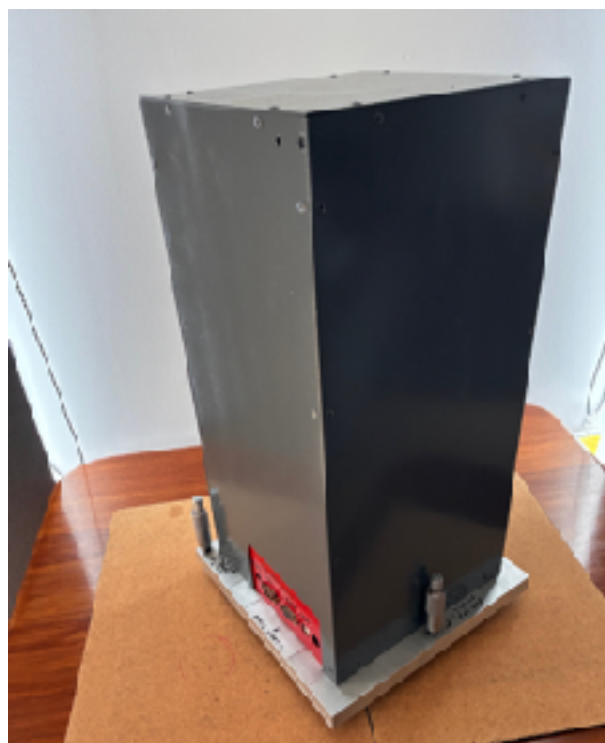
Showing replacement aluminium cover fabricated by Blair.
